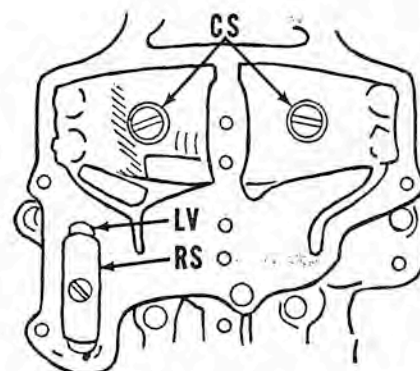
Crankcase typical of larger motors, with carburetor and inlet valve removed. The reed-type crankcase bleeder valve (LV) and reed stop (RS) can be removed for service after manifold is off. To disassemble the crankcase, the two center main bearing screws (CS) in inlet ports must be removed.
